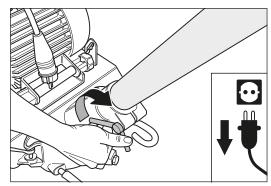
After inserting the guide tube, carefully tighten the wing nut at the machine housing.
